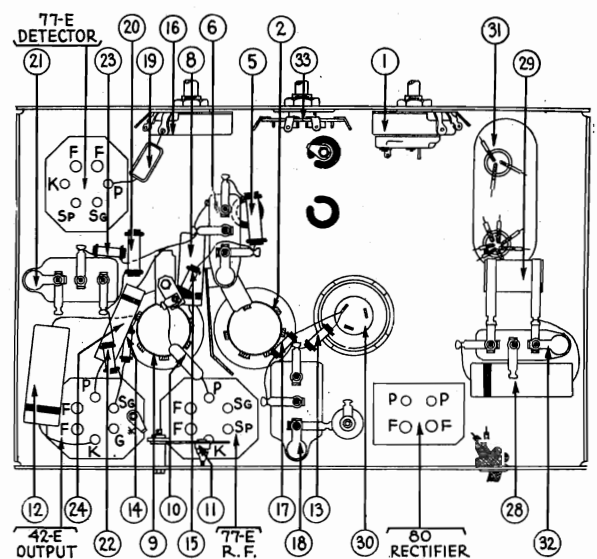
Bottom View of Chassis Showing Parts, and Location of Tube Sockets for Voltage Tests
